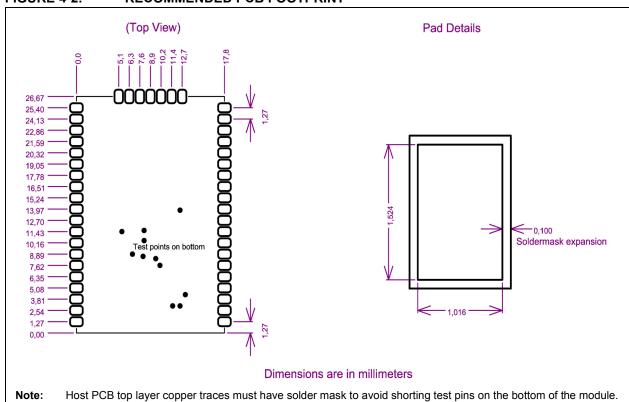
RECOMMENDED PCB FOOTPRINT
